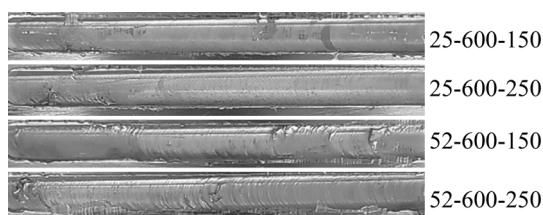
Weld surface morphology of FSWed joints with different welding parameters at different BM locations
